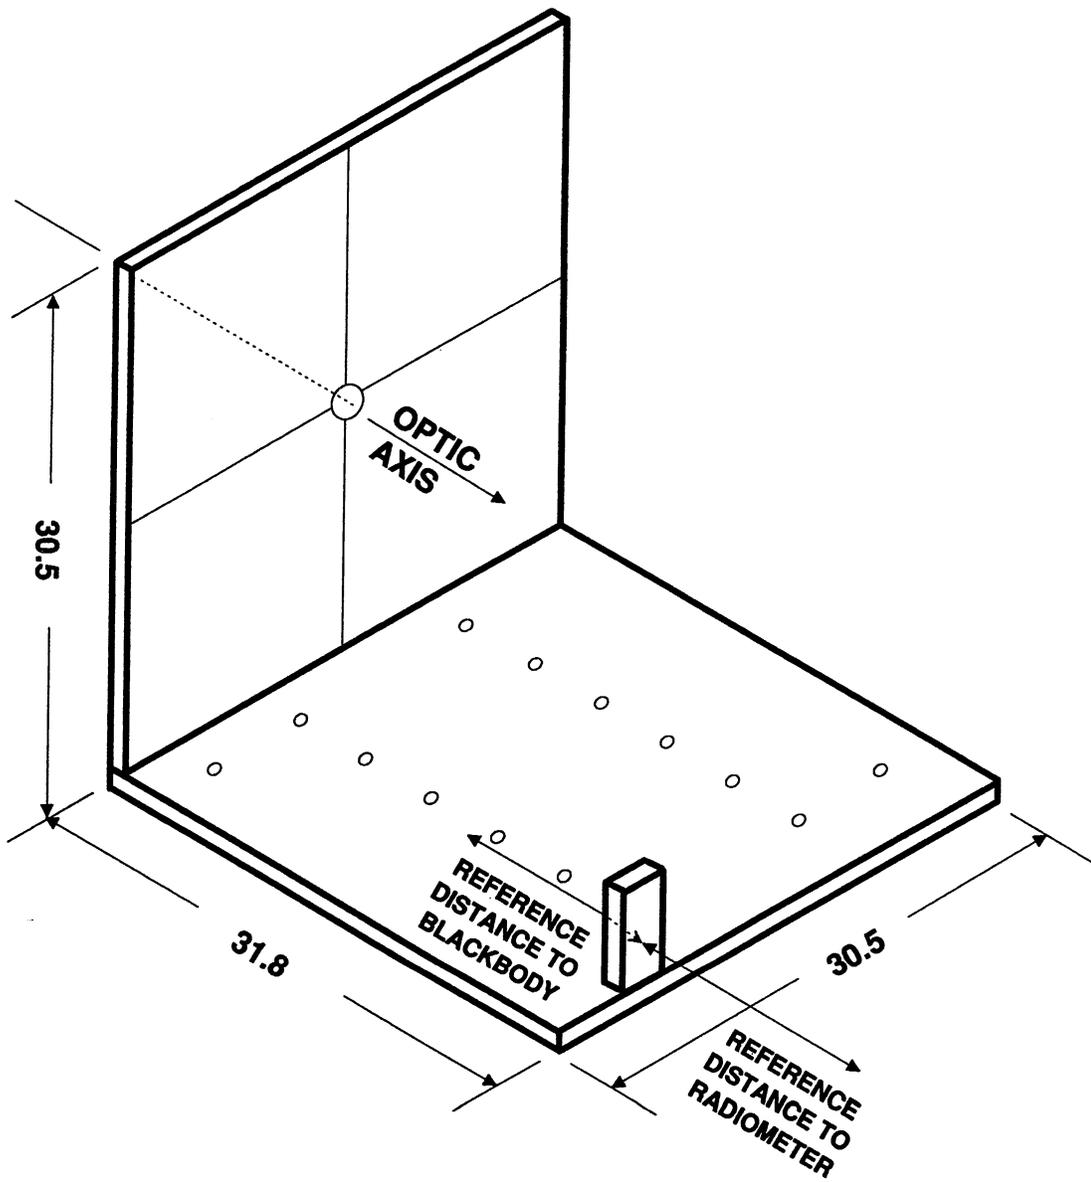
Blackbody Mounting Plate (Dimensions in cm).
